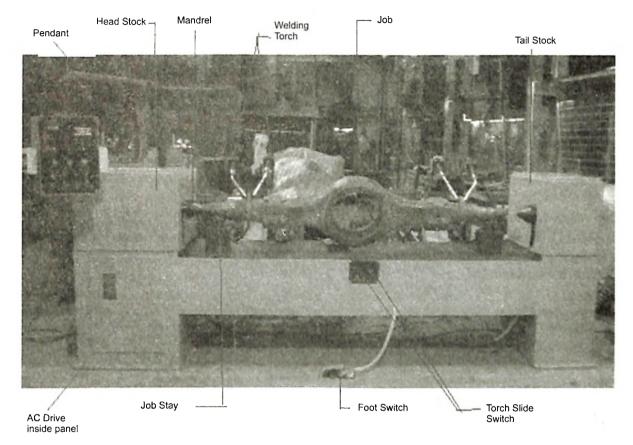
Welding for truck Live Axle / End Cover Welding on reinforcement plate of Differential Box.
